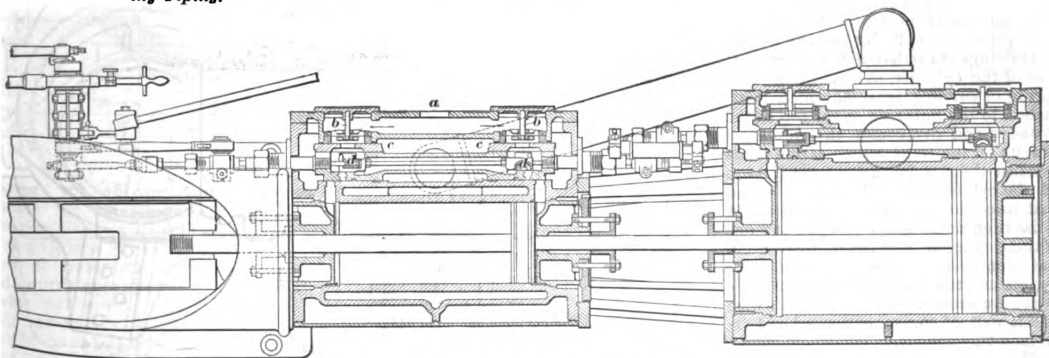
Sectional Plan through One Pair of Cylinders and Valves.
